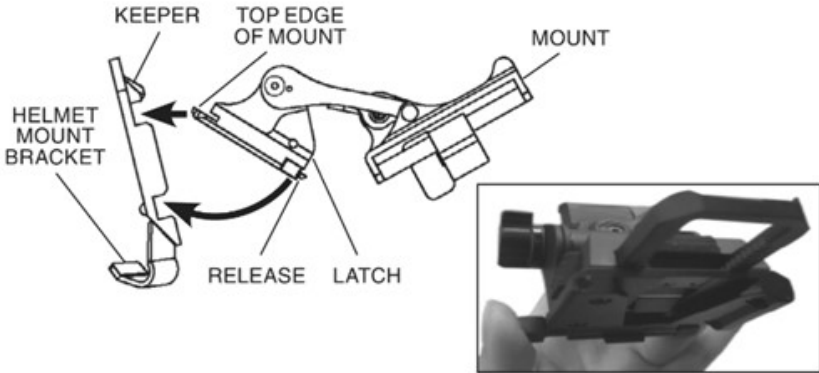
REASSEMBLY OF HELMET MOUNT
